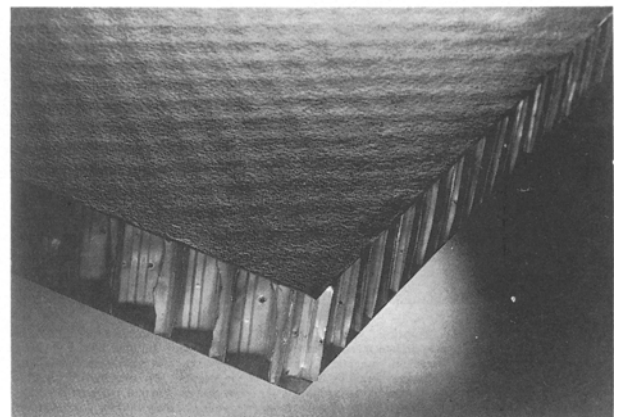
Honeycomb panel constructed of Ti-24Al-11Nb face sheets and Ti-3Al-2½V core [329].
